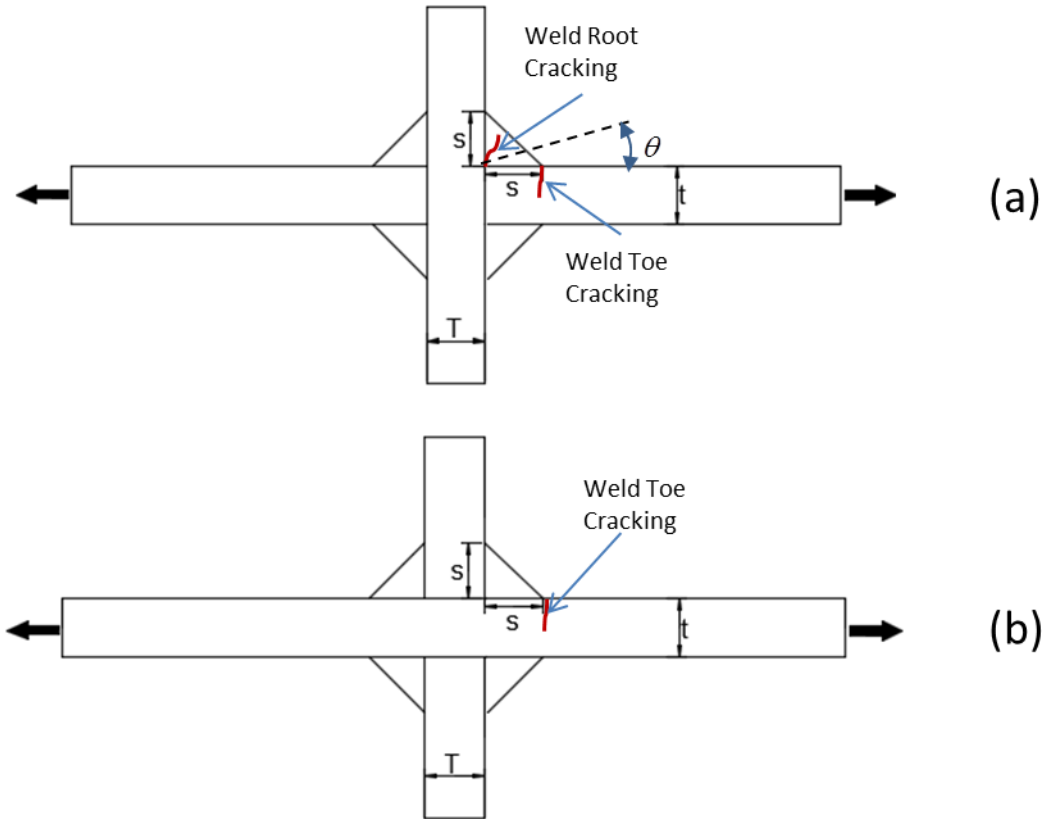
Fillet welded connections: (a) load-carrying cruciform joint; (b) Non-load-carrying cruciform joint
